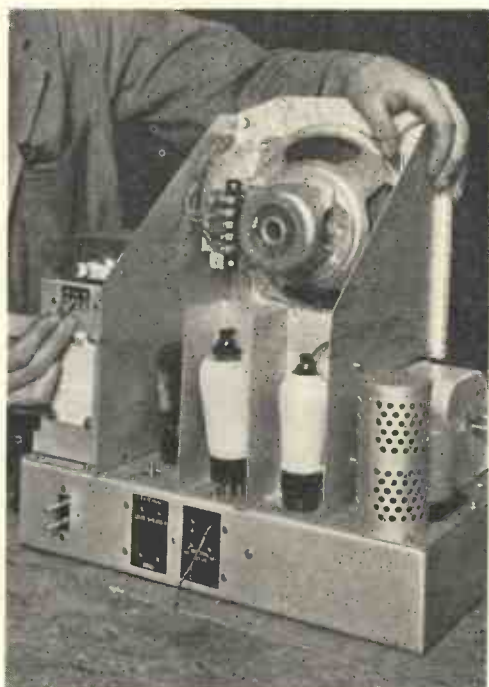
SETTING THE MAINS CONTACT SCREW TO UNIT SUPPLY VOLTAGE.
